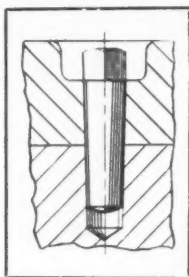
Design of taper pin applicable to cast-in or counter-bored recesses.
